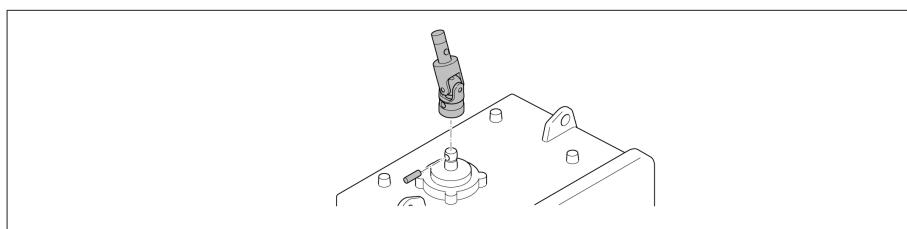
Fitting cardan joint to ball-shaped head of motor-drive unit
